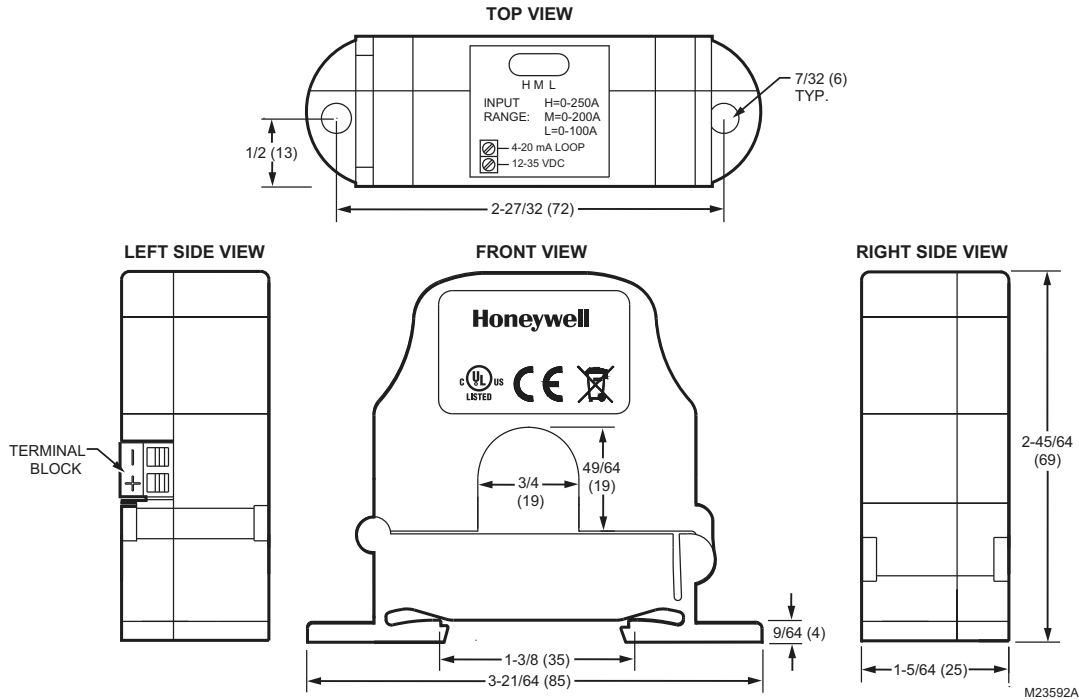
CTP-20 current sensor dimensions in inches (mm)
